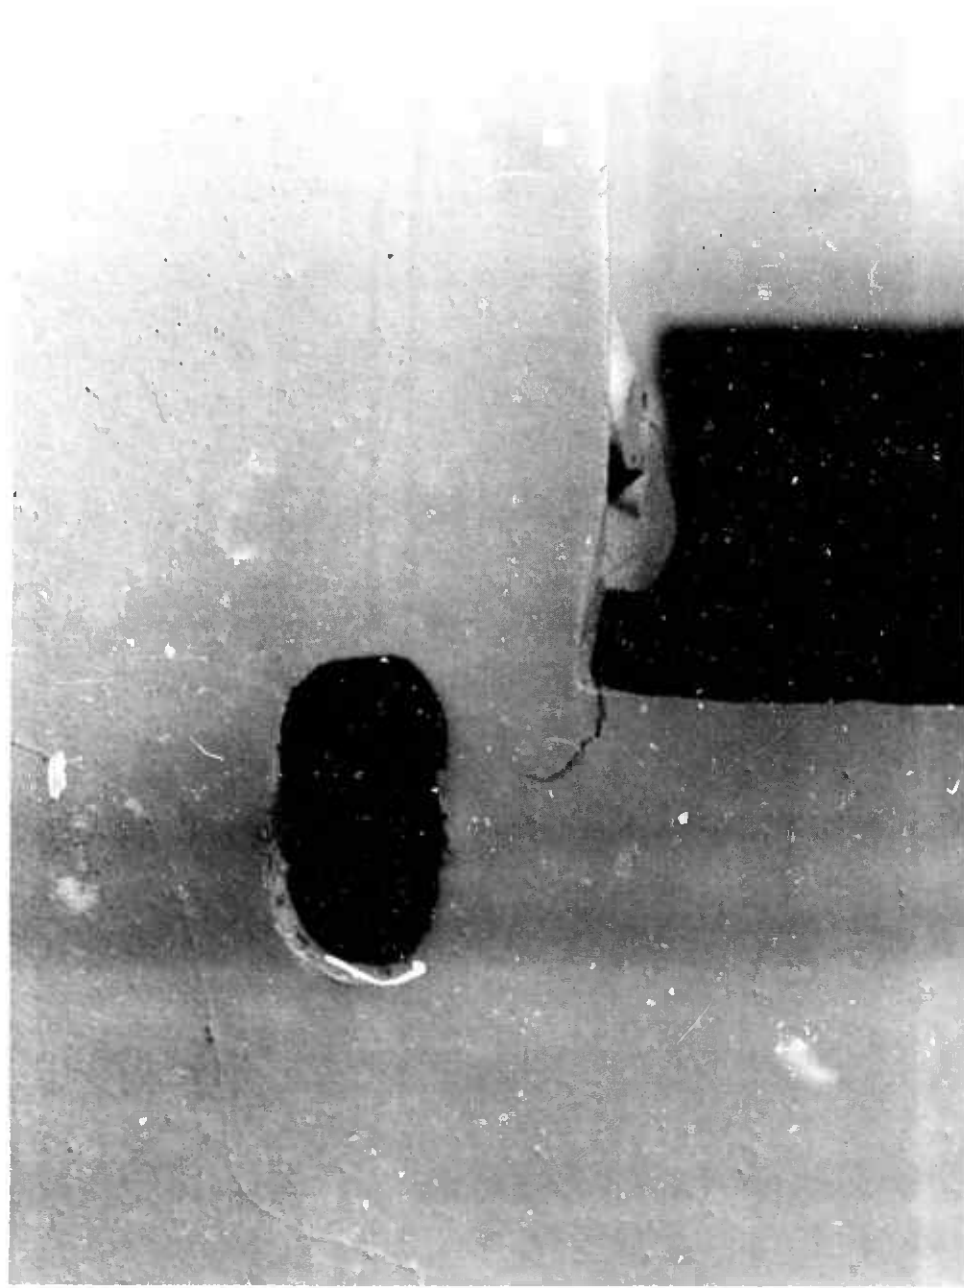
Damage from Shock Test - 1600 A Breaker Bay (Rear).
